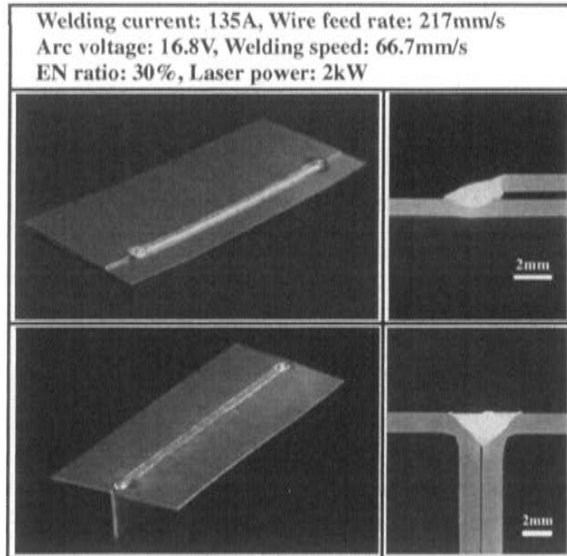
Welding examples by diode laser and AC pulsed MIG arc hybrid welding system
